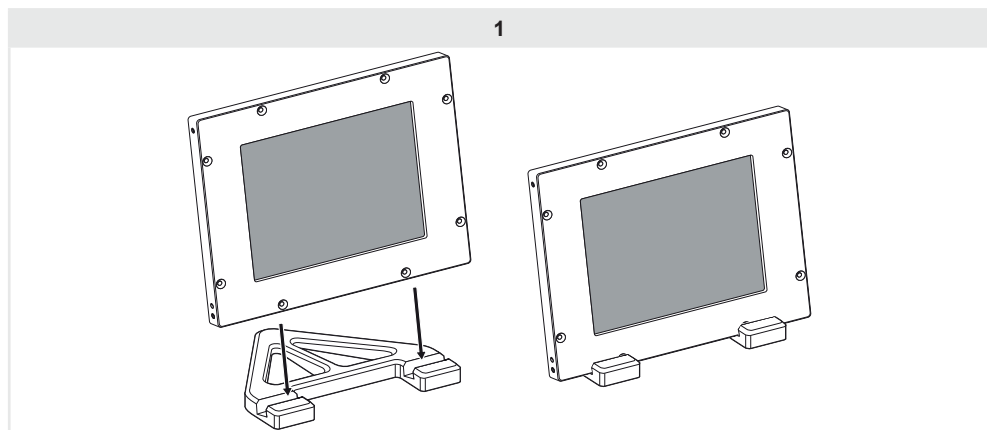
Attaching the table top stand to the CI for use in the laboratory.
